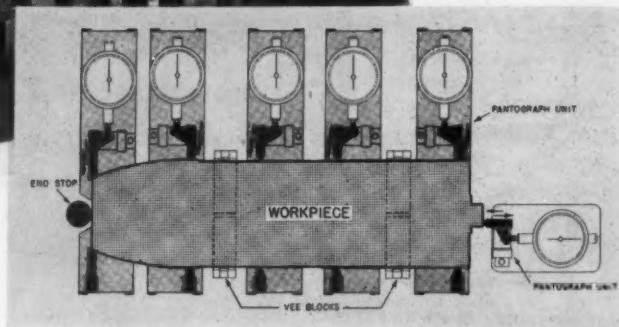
This illustration shows a type of gage apparatus whereby the operator can all but toss a complex workpiece into the gage and come up instantly with accurate readings of all the multiple dimensions.
